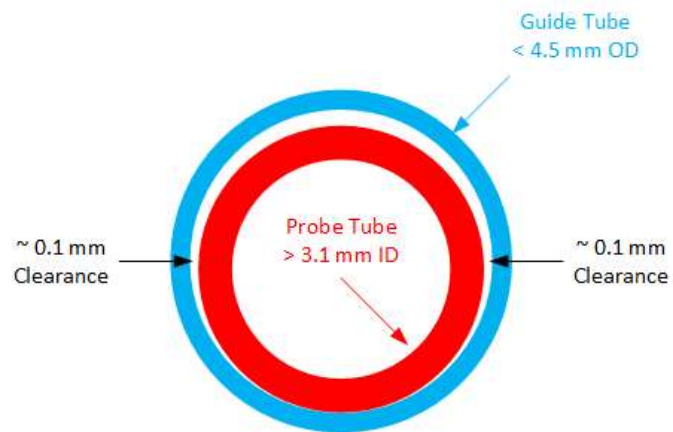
The tube dimensions are constrained by the size of the Hall probe and the size of the beam pipe.
